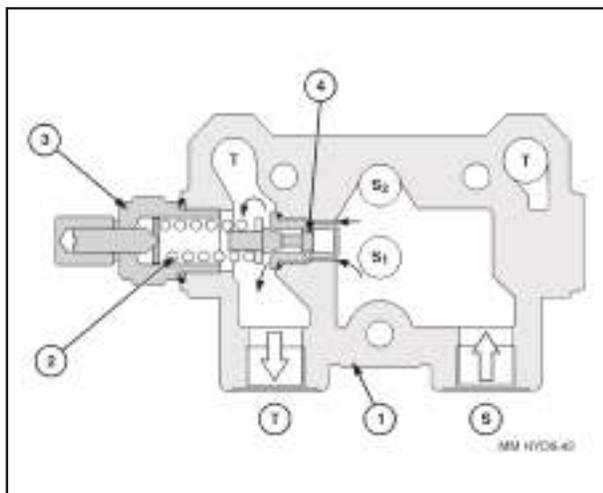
SYSTEM RELIEF VALVE OPEN
